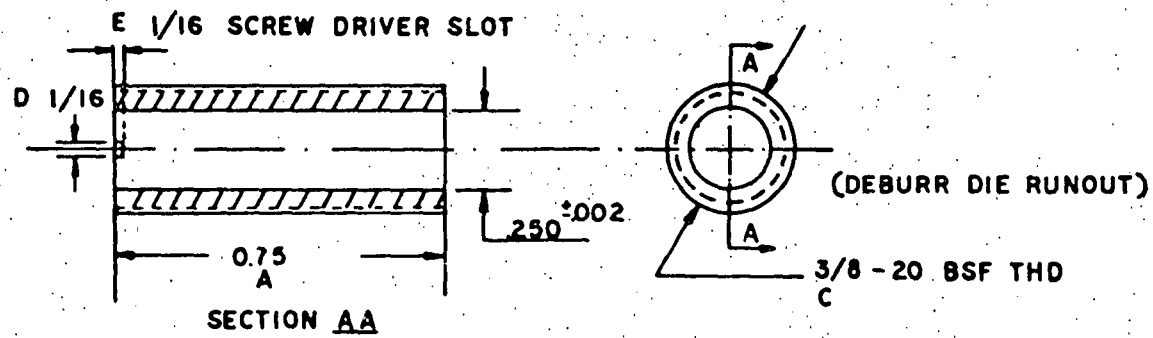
Seal barrel insert material - polypropylene, Part No. T-12015
